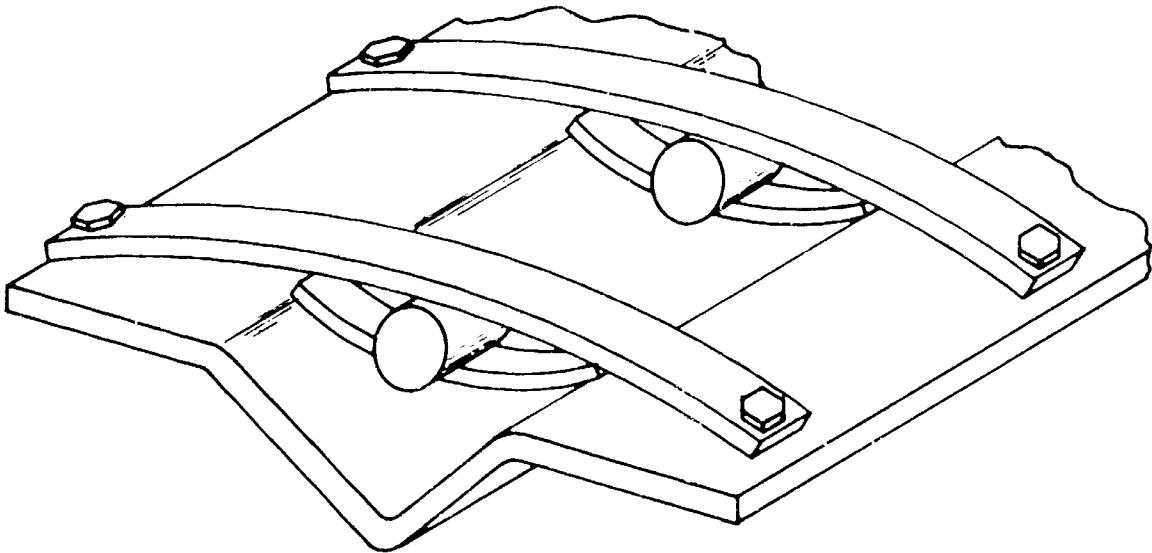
FLEXURAL TEST FIXTURE FOR LONG-TERM LOADING
